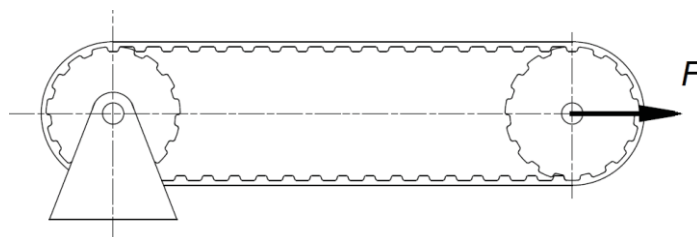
DRIVE BELT — TENSILE STRENGTH TEST
